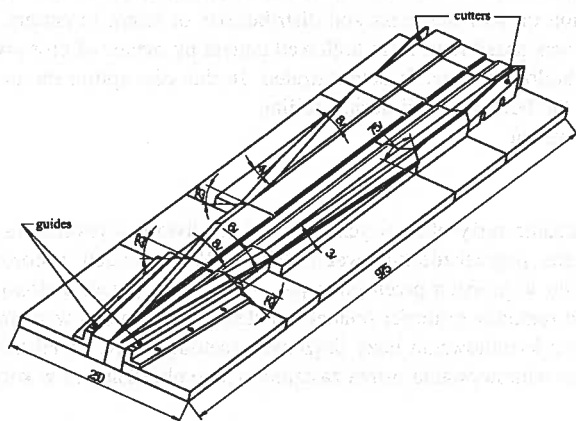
Schema of a wedge tool guaranteeing CWR body of cutter from full charge
